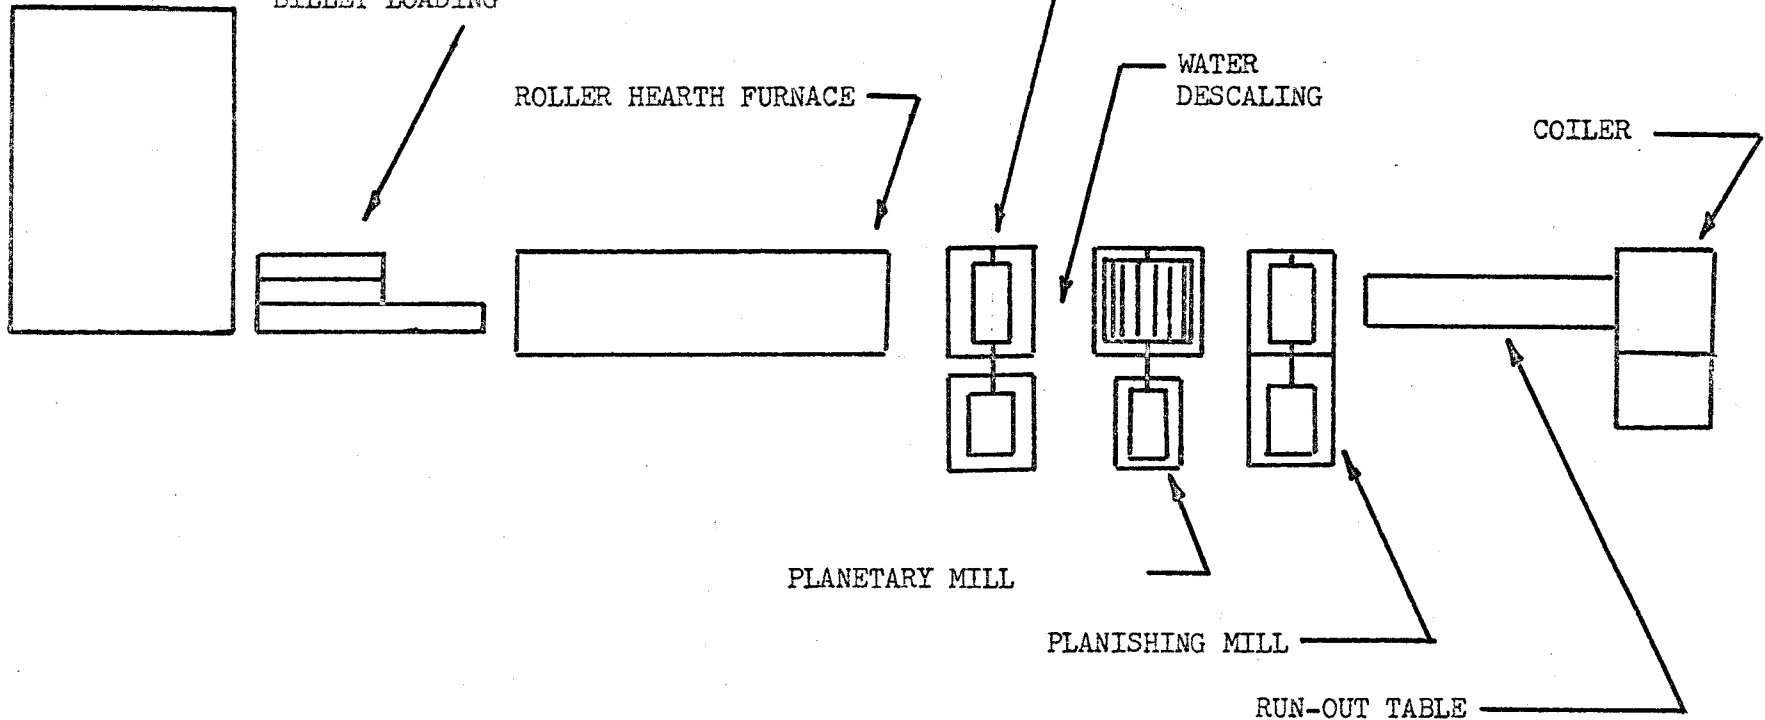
TYPICAL PLANETARY MILL EQUIPMENT PLAN
